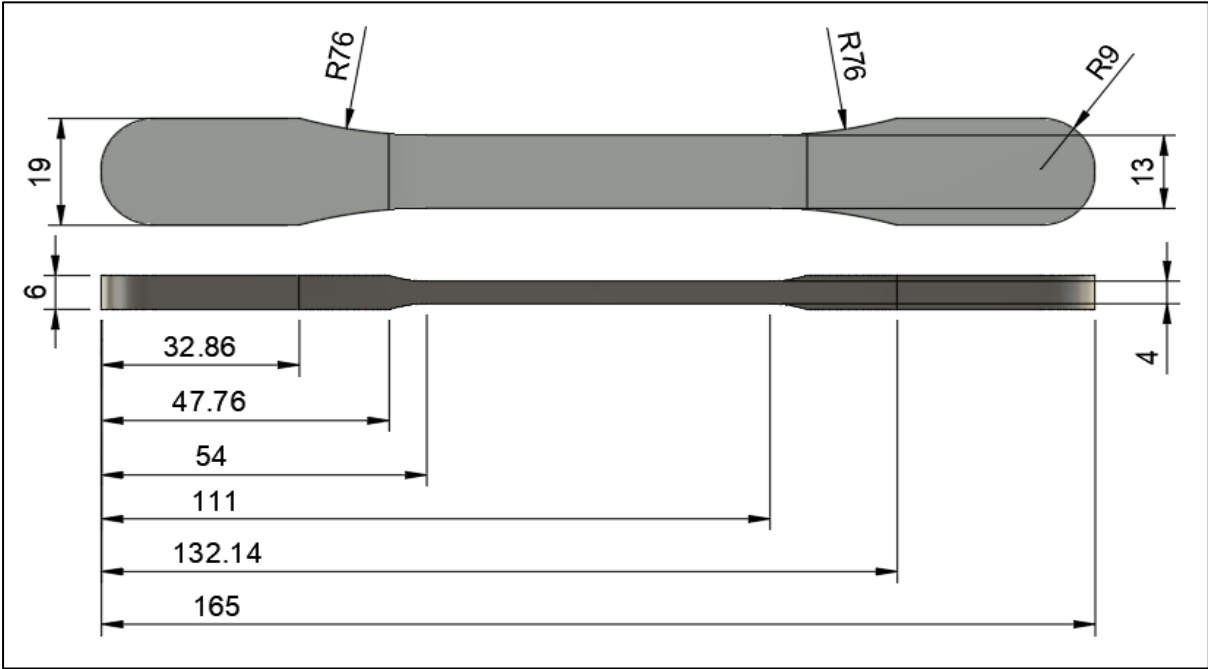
Technical Drawing for the Type I Specimens with Built-in Tabs.
